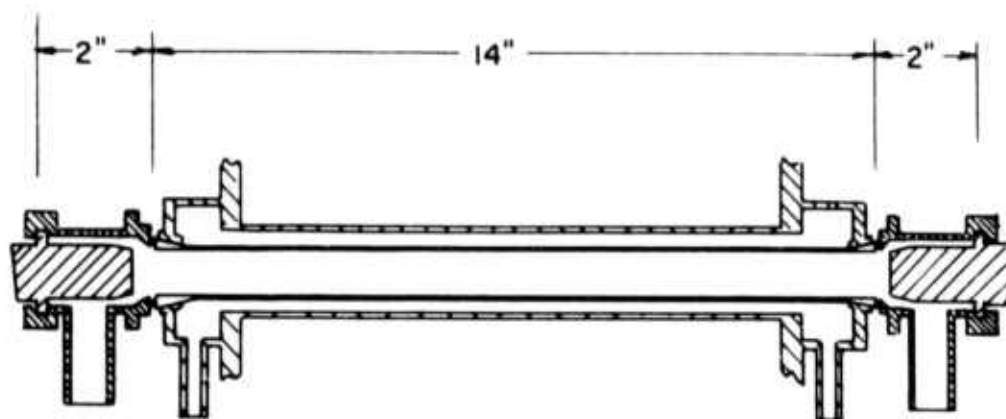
Cutaway View of Actual Water-Jacketed Laser Cell Demonstrating Cell Assembly.
